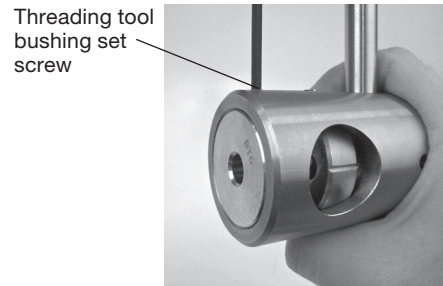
Loosening threading tool bushing set screws (the second screw is on opposite side of housing)
